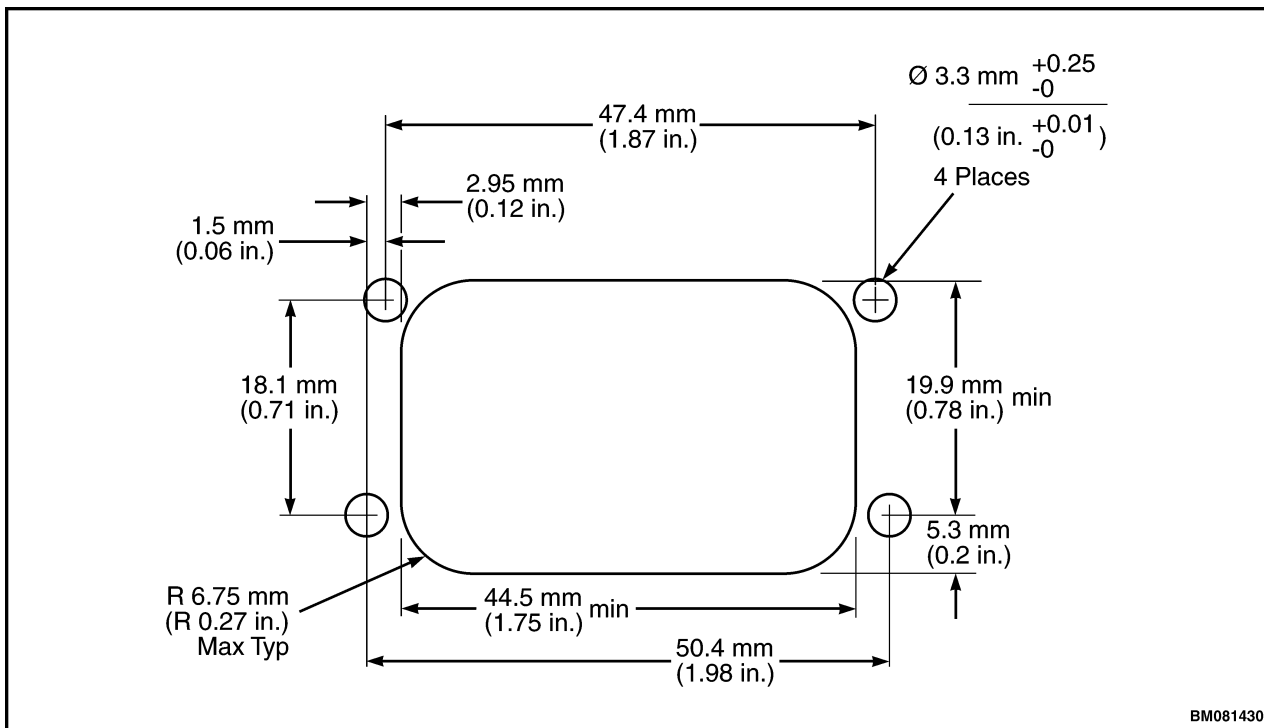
AMPSEAL Plug and Header Assembly Panel Mounting
